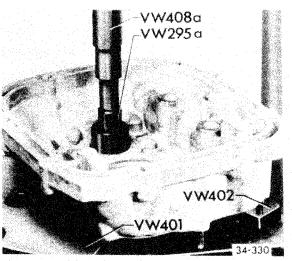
Pinion needle bearing in gear carrier housing, removing
